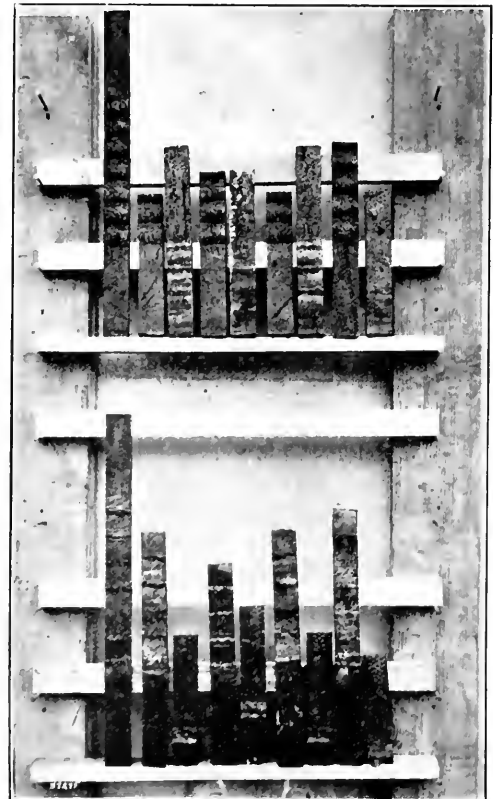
SPECIAL SPECIMENS CUT TRANSVERSELY TO WELDED JOINTS, TESTED IN TENSION
